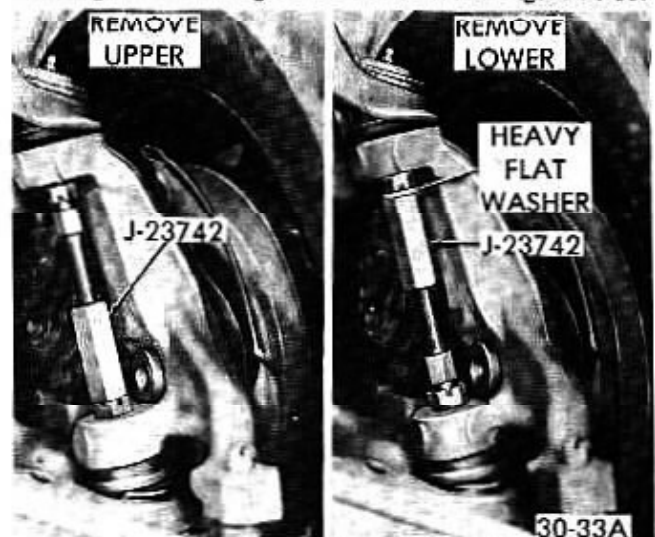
Separating Steering Knuckle from Ball Joint
